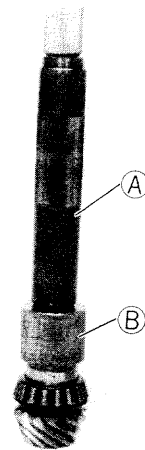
(A) Special tool (Bearing installer attachment 09924-74510)
